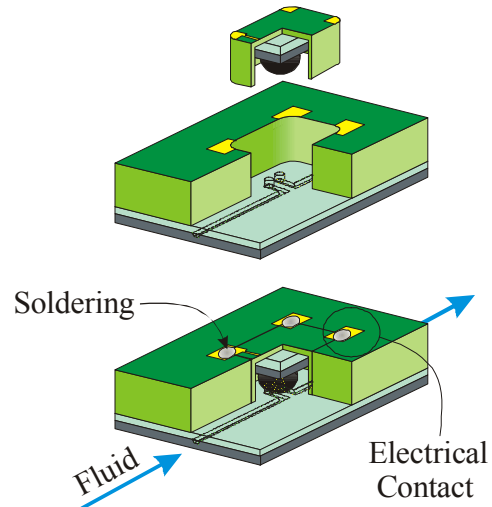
Assembly drawing of the modules and the wet circuit board.
